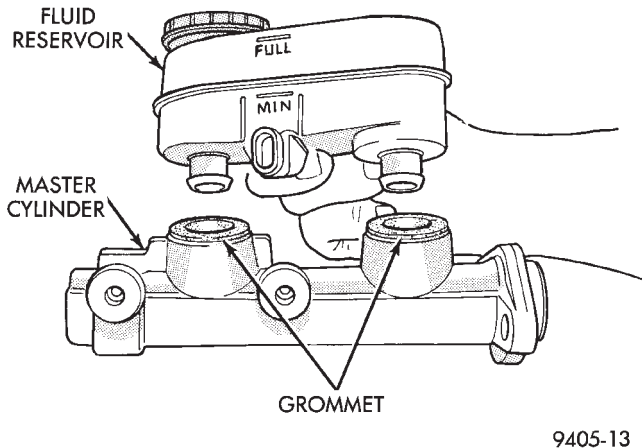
Removing Fluid Reservoir From Master Cylinder
